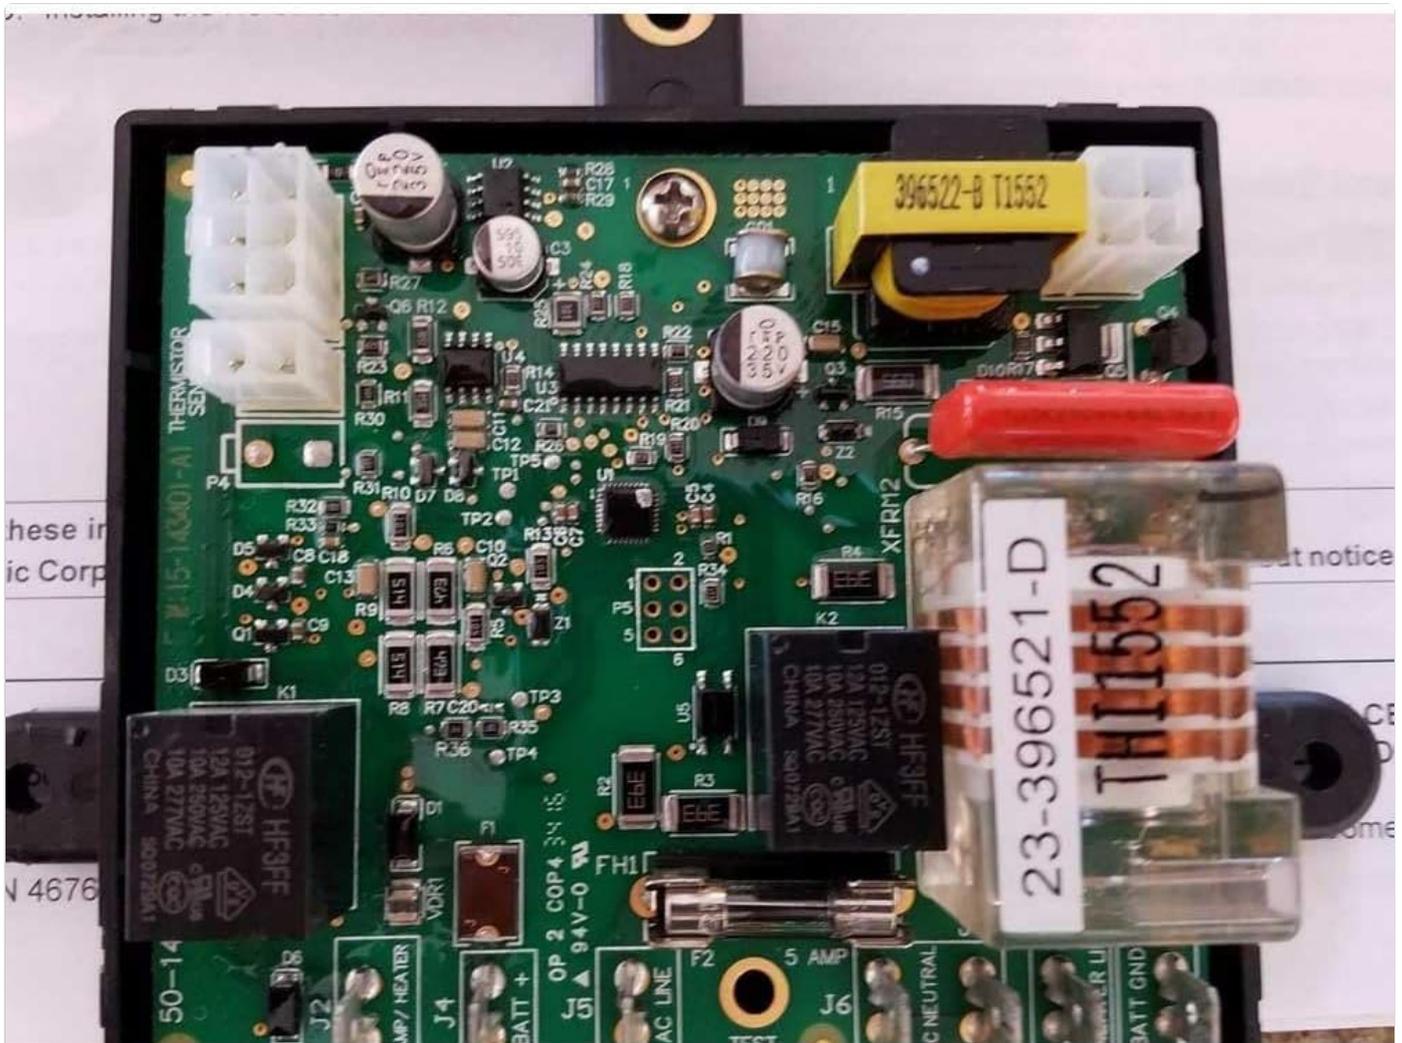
Dometic 3316348.900 Power Module Board. This image shows the circuit board with various connectors, relays, and components. Key connection points for power, thermistor, and other functions are visible.
